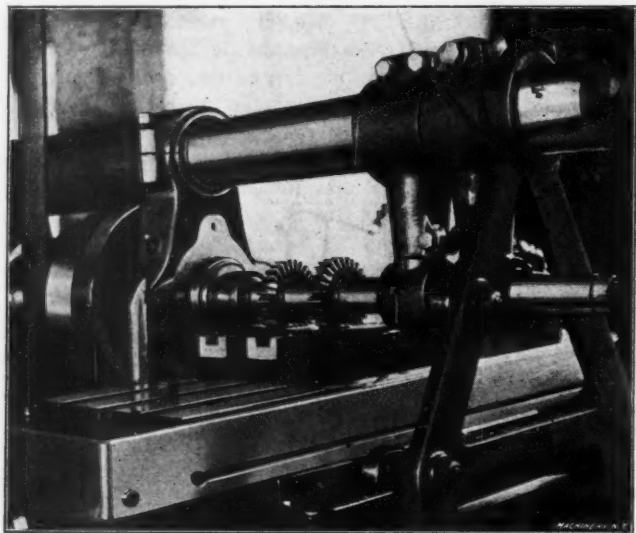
Fixture for Milling the Grooves in the Locking Bolt Blocks
